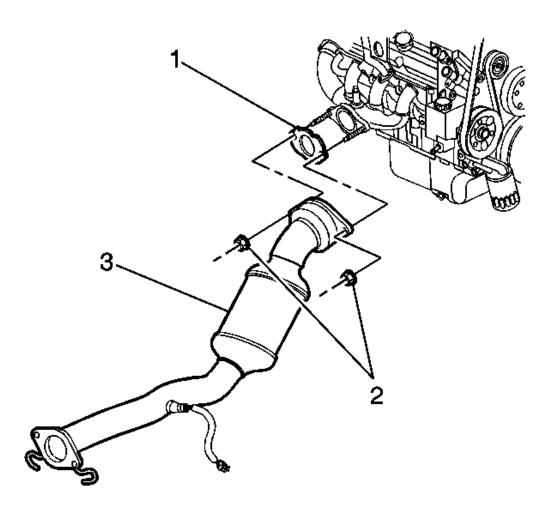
Right Exhaust Manifold & Catalytic Converter Pipe Courtesy of GENERAL MOTORS CORP.
